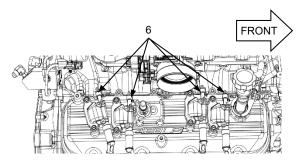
Passenger side Ignition Coil connector (6) locations. NOTE: *Intake Air Tube not shown for clarity.
